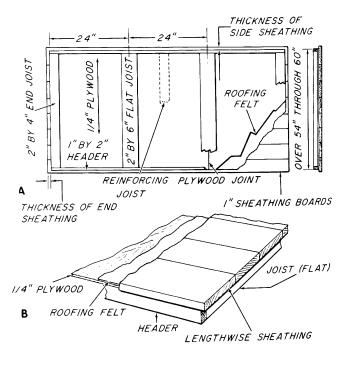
Typical top for sheathed crates over 54 through 60 inches wide: A, Inside view, B, fabrication.
